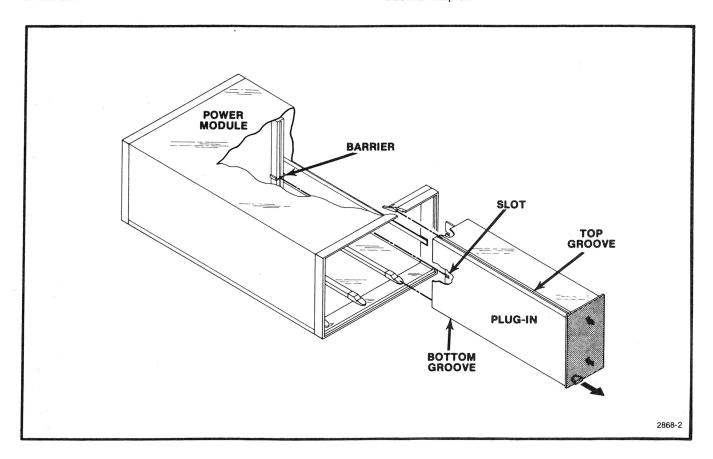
067-0938-00 Calibration Fixture installation and removal.
